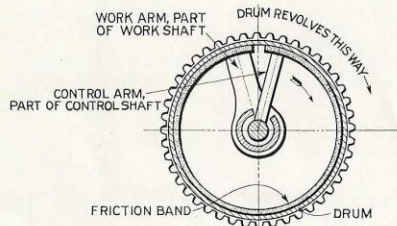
Drum with friction band applied internally. Drive is by gears on drum.
